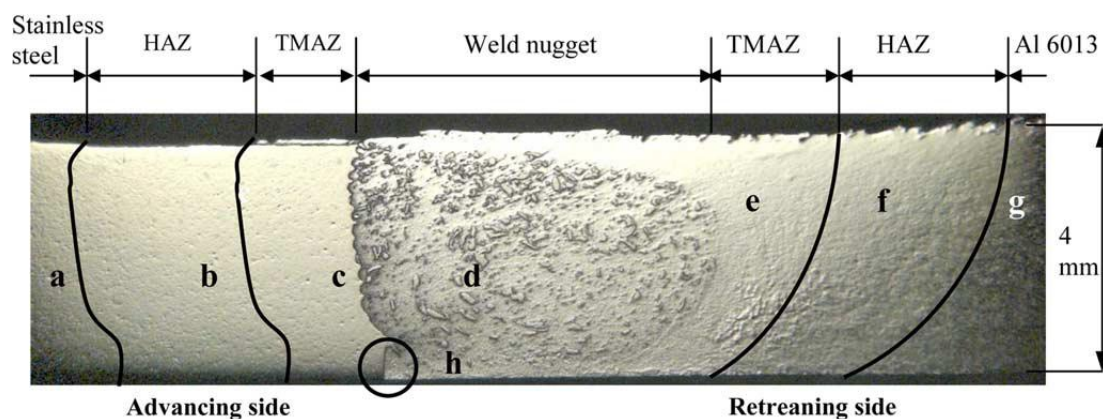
Macroscopic overview of the cross-section of the friction stir welded Al 6013-T4 alloy to X5CrNi18-10 stainless steel (Uzun et al., 2004).
